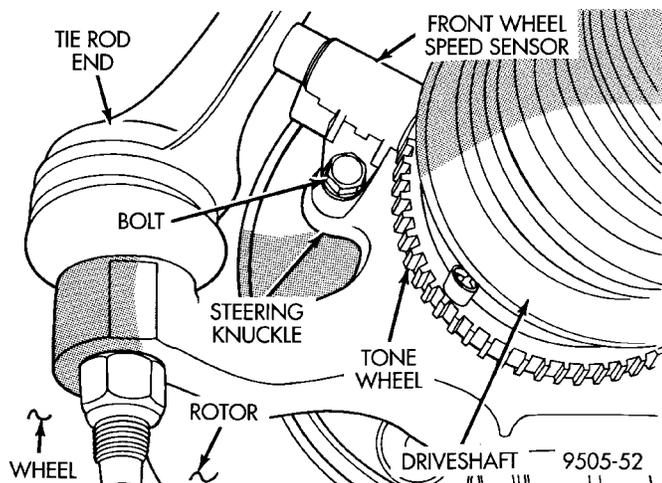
Front Wheel Speed Sensor Attaching Bolt
